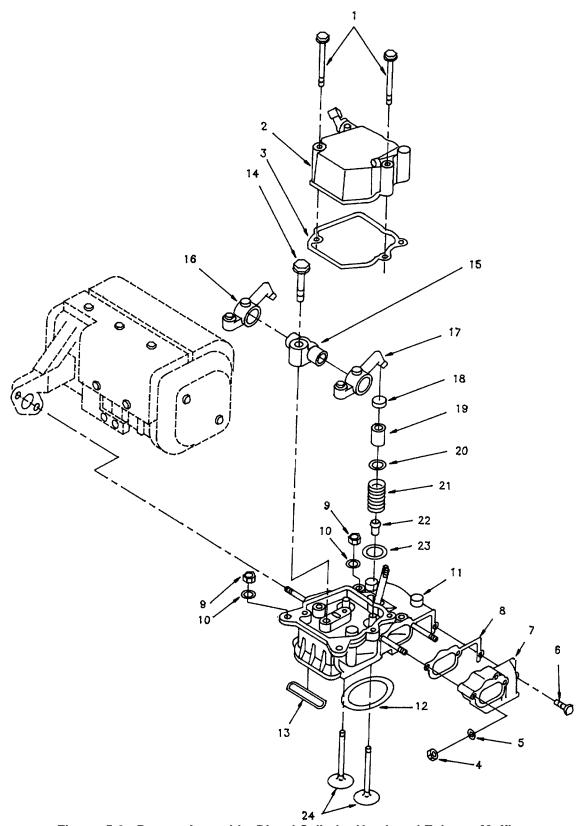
Bonnet Assembly, Diesel Cylinder Head, and Exhaust Muffler.
